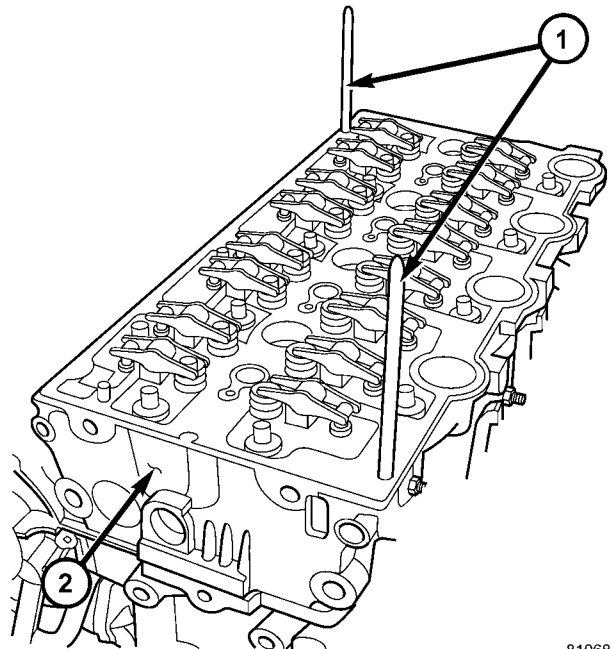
CYLINDER HEAD COVER ALIGNMENT STUDS VM.1066
